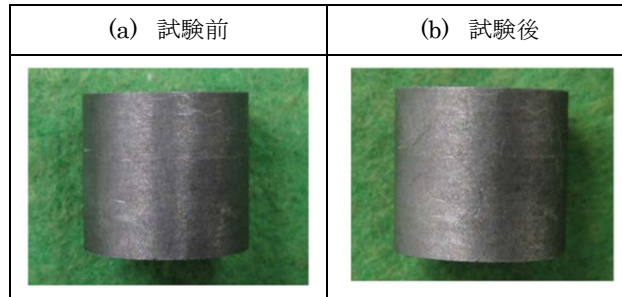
Appearance of composite test piece (30 vol%) (a) before and (b) after heat-checking test.
